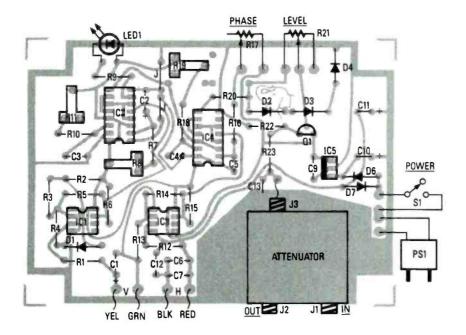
THE PARTS LAYOUT. The attenuator subassembly is installed directly on the component side of the PC board.
